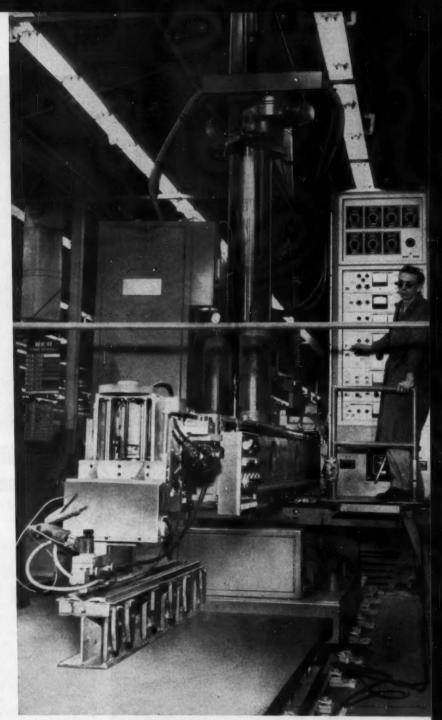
Huge boom type welding machine that can be moved along a track for performing operations at various points.
